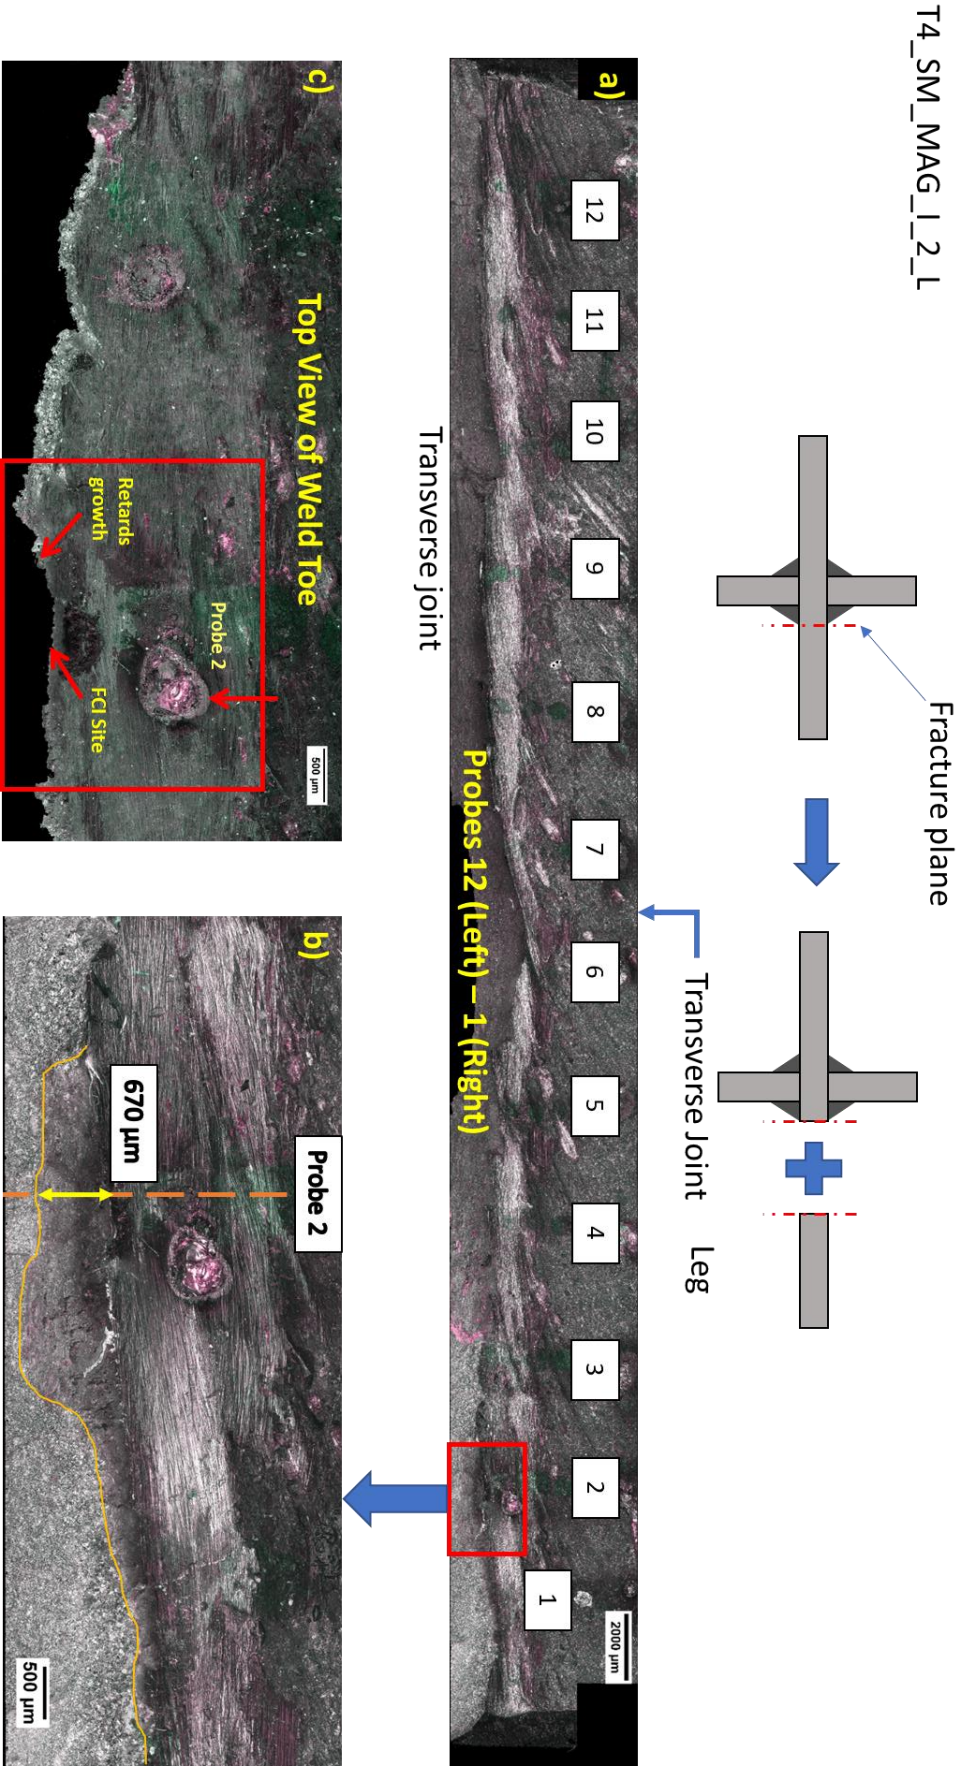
T4_SM_MAG_I_2_L - 3D scans of the cruciform section of the fractured specimen. Images were taken in the Alicona Infinite Focus Microscope.
